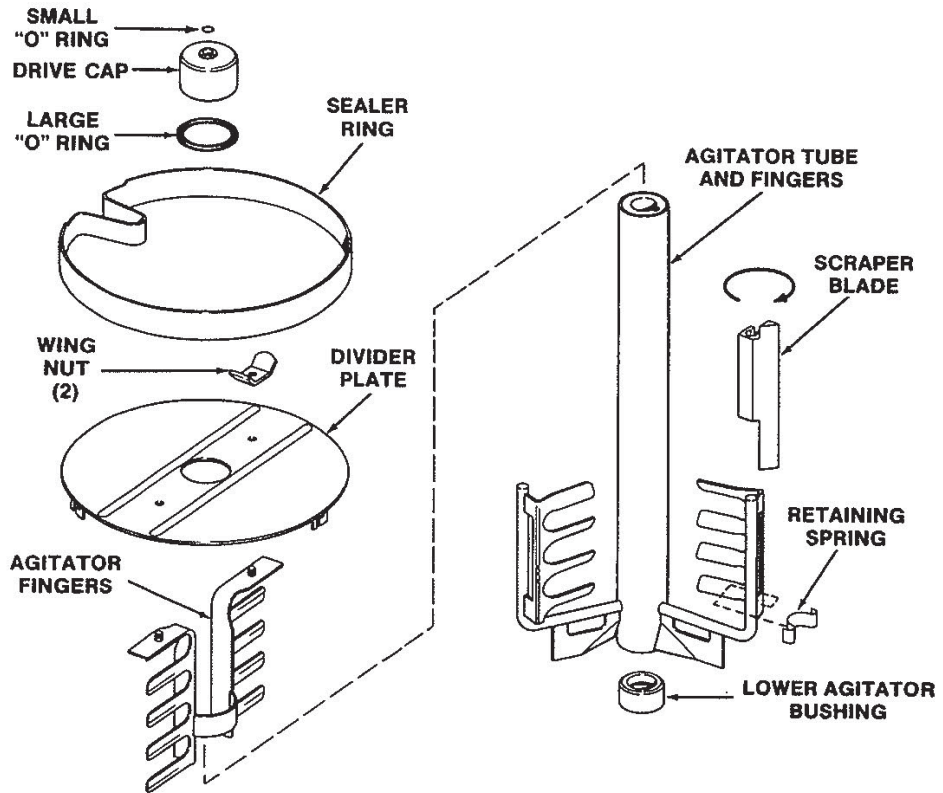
Exploded View of Divider Plate and Agitator Assembly
